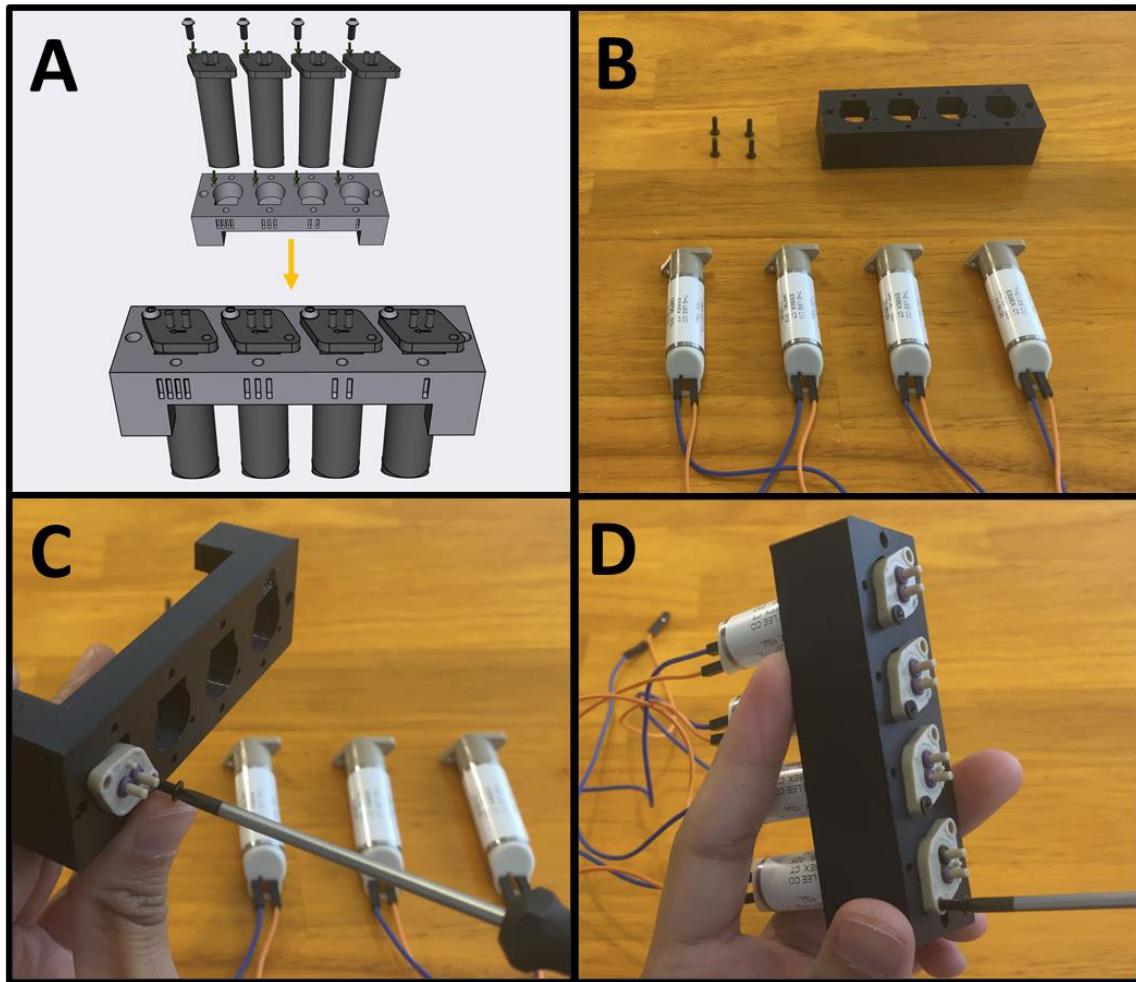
d: The procedure for mounting the Pumps to the Pump Mount.
